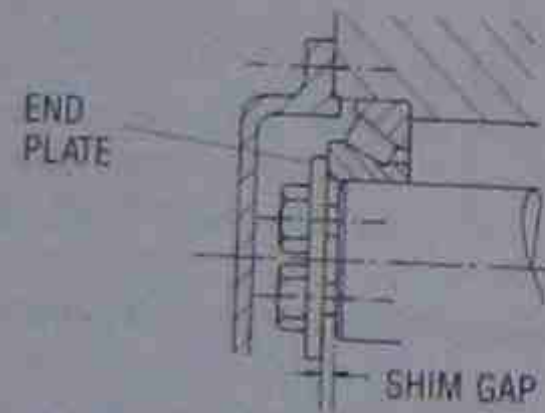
Adjusting the shim pack for tapered roller bearings.
